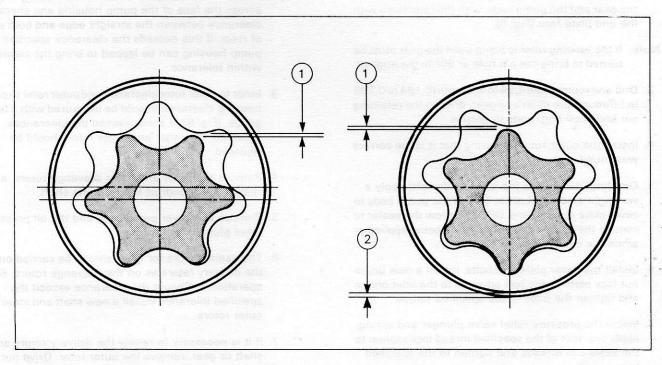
Measuring Rotor Clearance - With High Inclination Oil Pans
